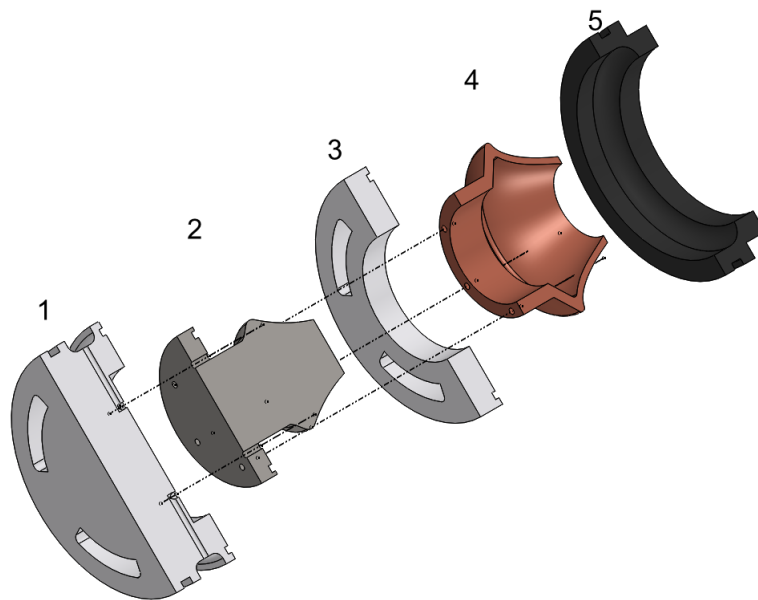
Exploded View of Complete Nozzle Assembly
